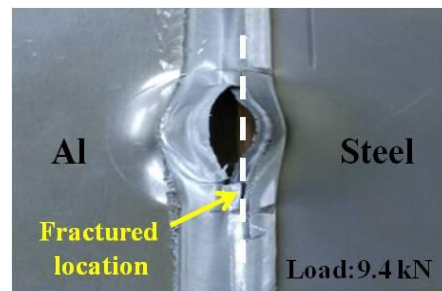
Macrograph of fractured tensile specimen of LAFS welds
